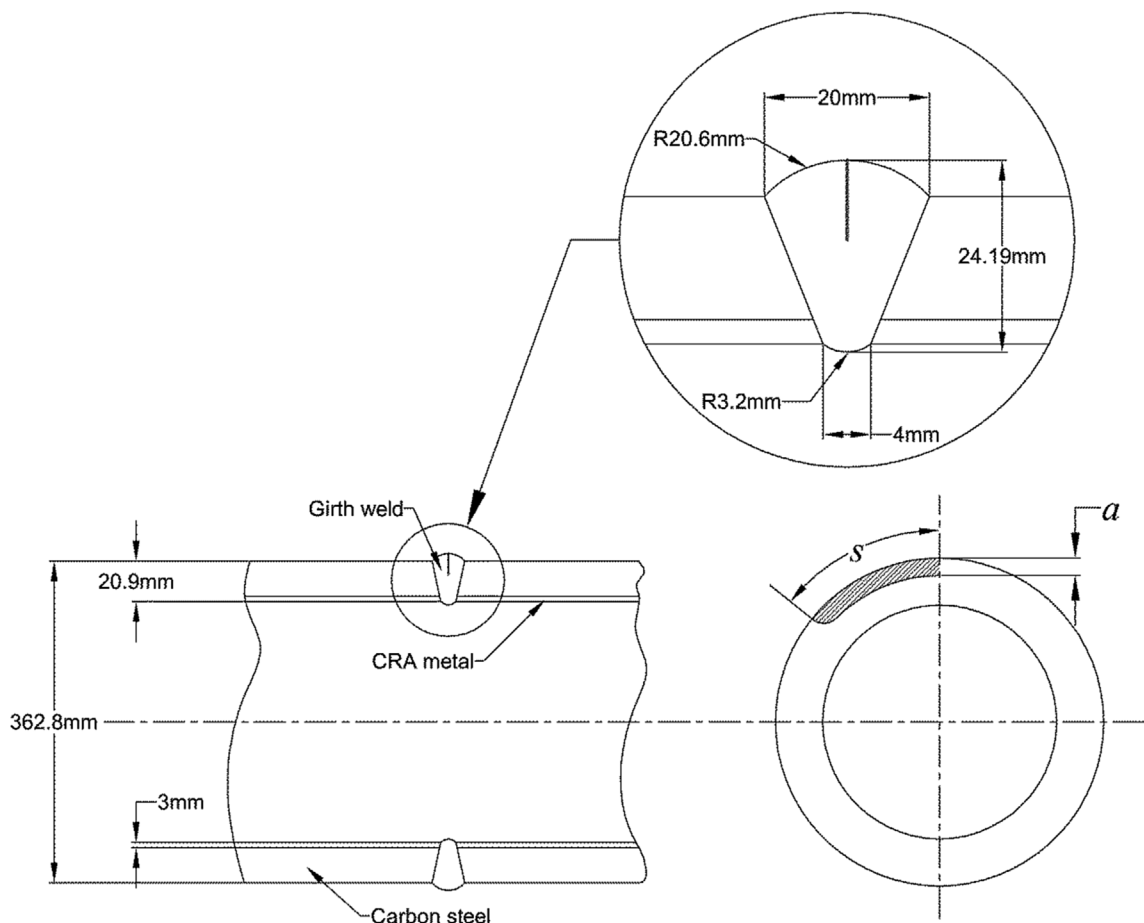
Details of girth welded clad pipeline containing a canoe shape surface crack.
